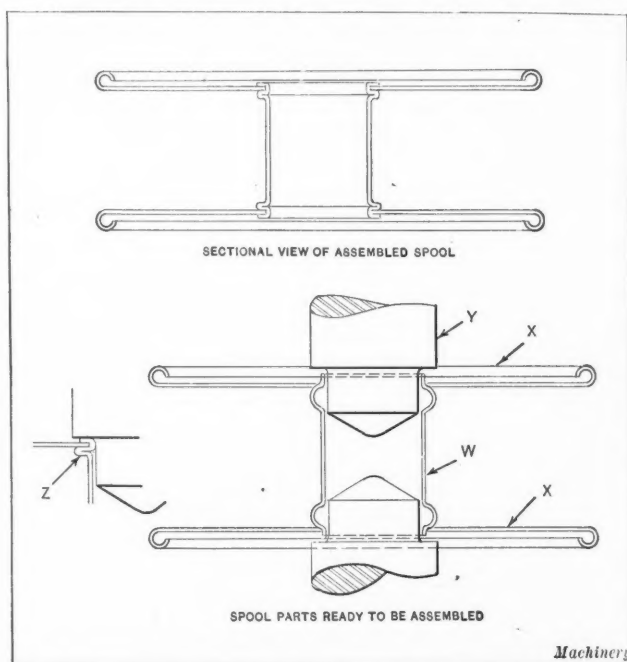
Views showing Assembled and Unassembled Metal Spool
